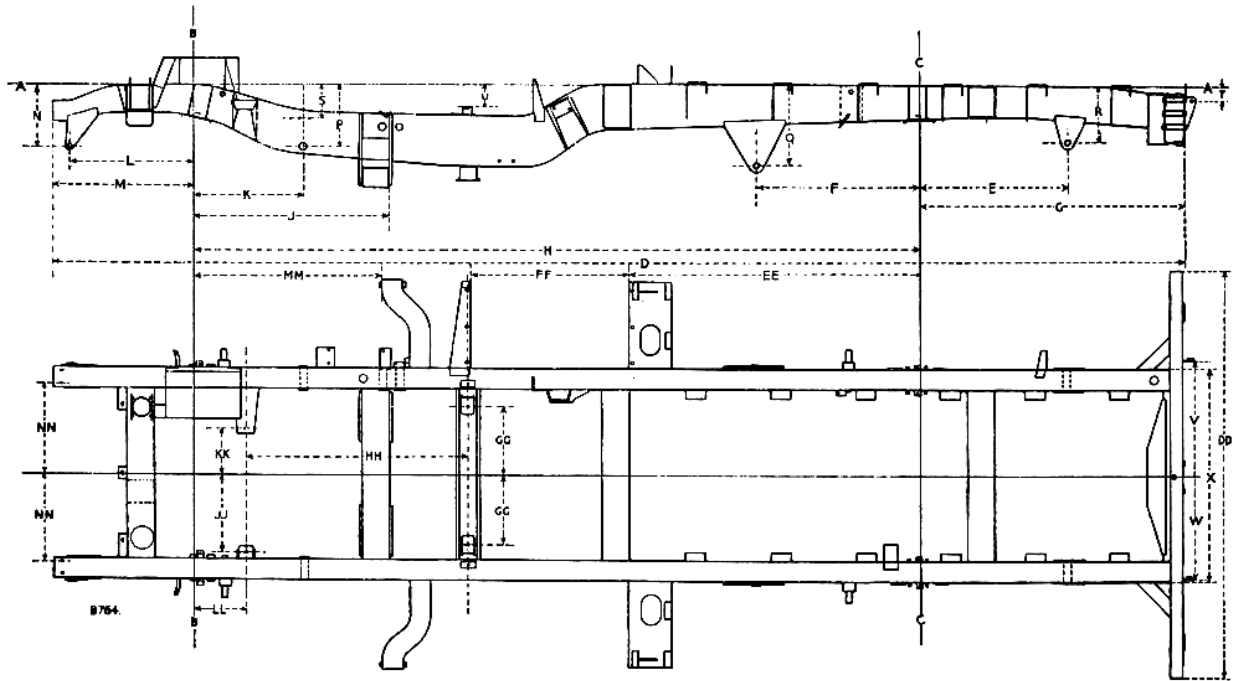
Chassis frame dimensions (Land-Rovers 107 and 109).
